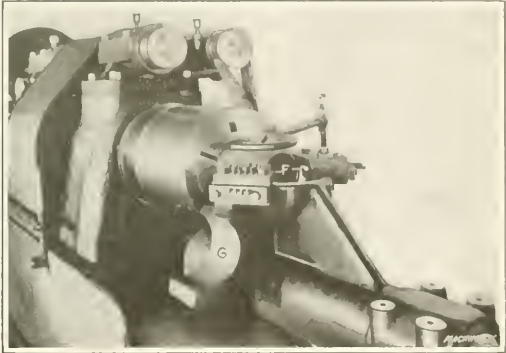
Tools F at work roughing out Nose of Shell Forging
